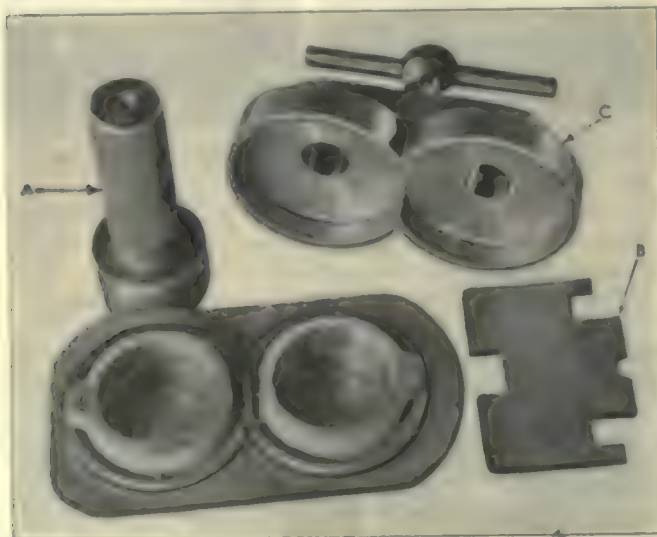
INSPECTION GAGES FOR BEARING CASE COVERS
